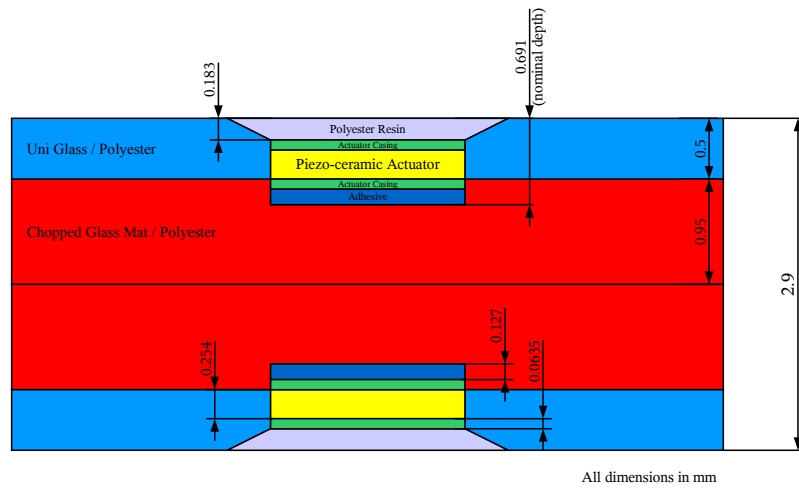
Schematic of Plate Strip A cross section at actuator location, showing actuator embedding details.
